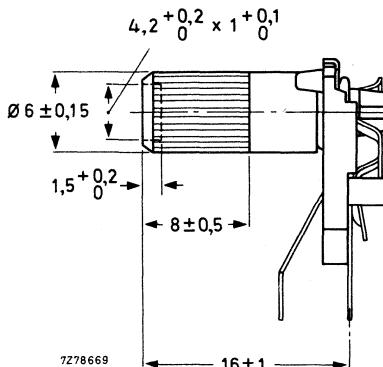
Test switch for vertical mounting, with adjustment knob at the side of the base plate.
